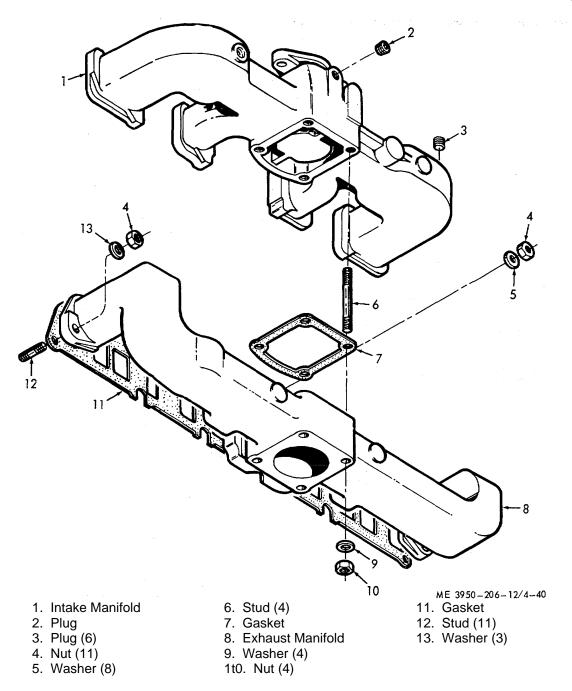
Exhaust and Intake Manifolds, exploded view.
